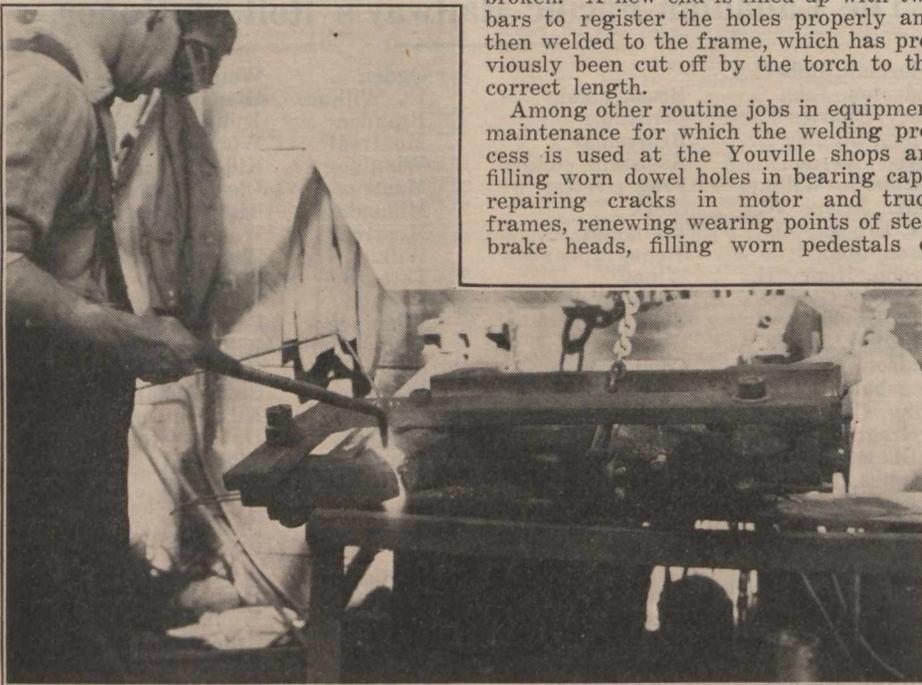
Welding New Gear Case Lug on Motor.
